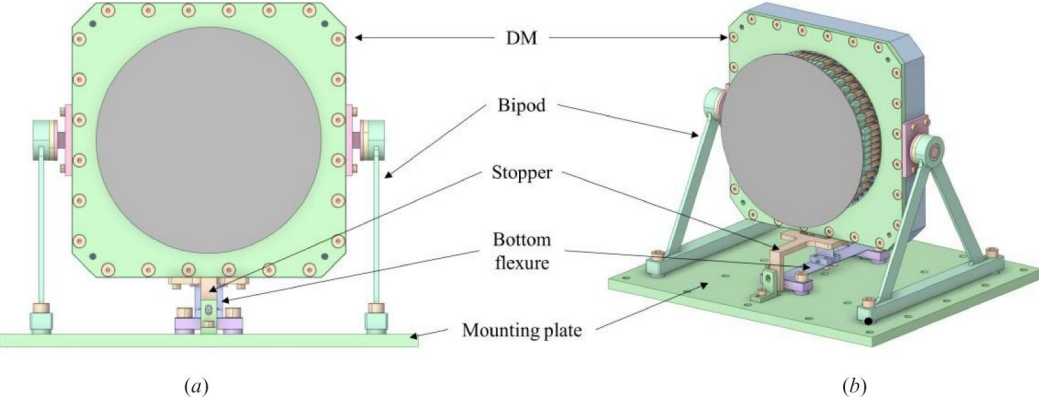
Line module type SiC DM with mounting stands: (a) front view, (b) trimetric view.
